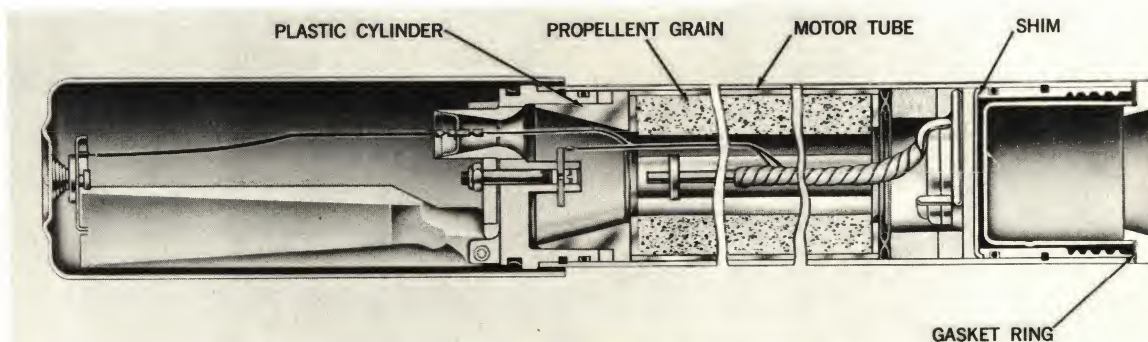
2.75-Inch Rocket Motor Mk 4 Mod 0, Sectional View.
